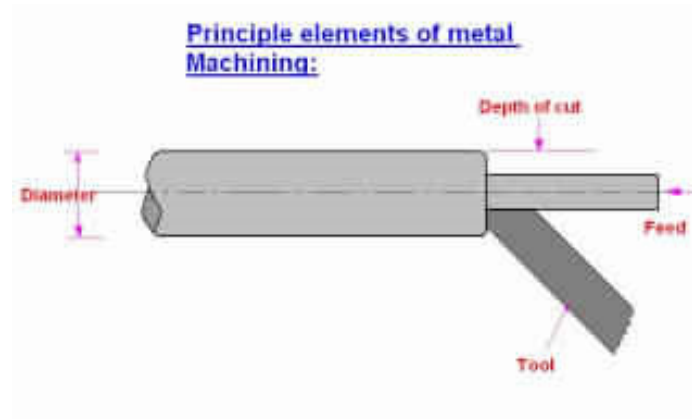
Cutting Speed, Feed and Depth Of Cut
